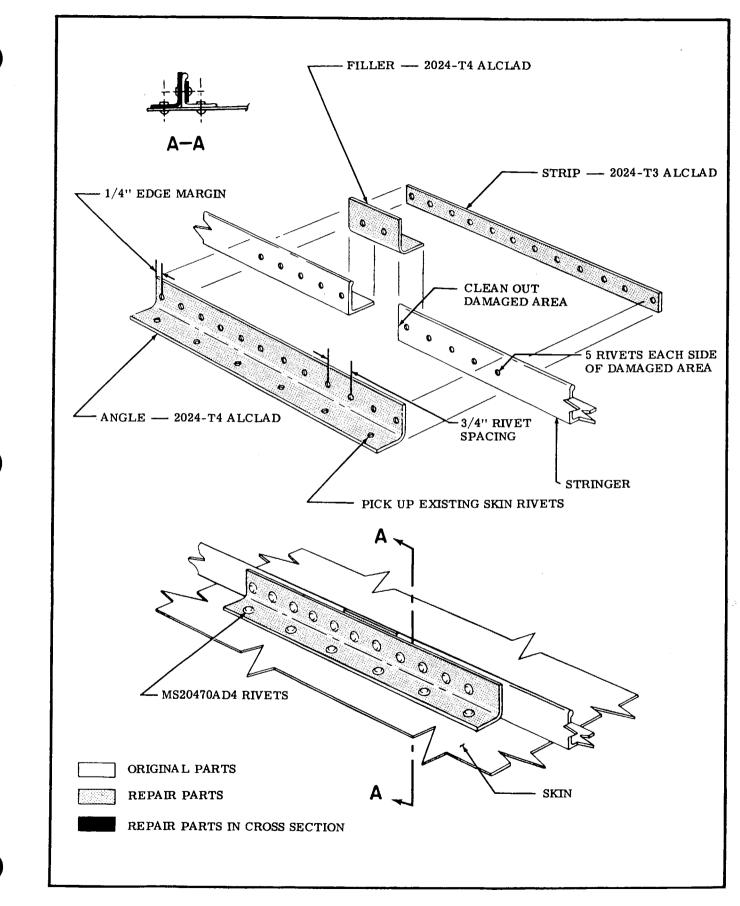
Stringer and Channel Repair (Sheet 2 of 4)
